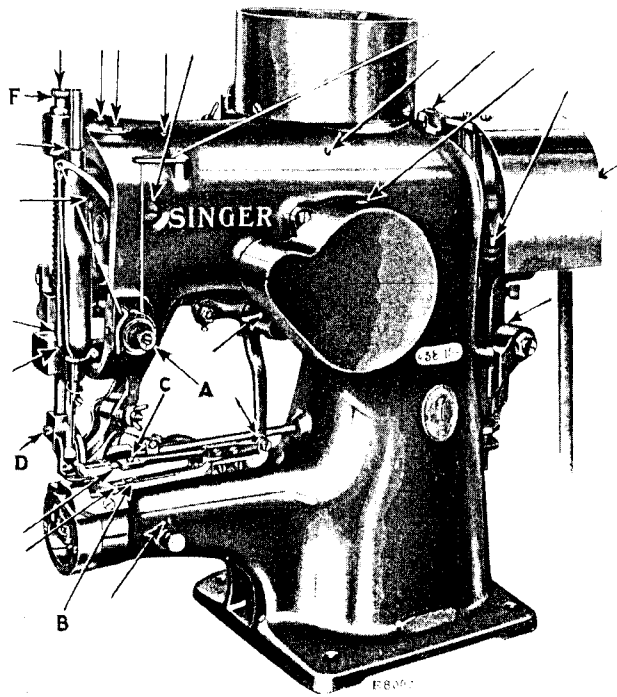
OILING POINTS AND ADJUSTMENTS AT THE RIGHT OF THE MACHINE
